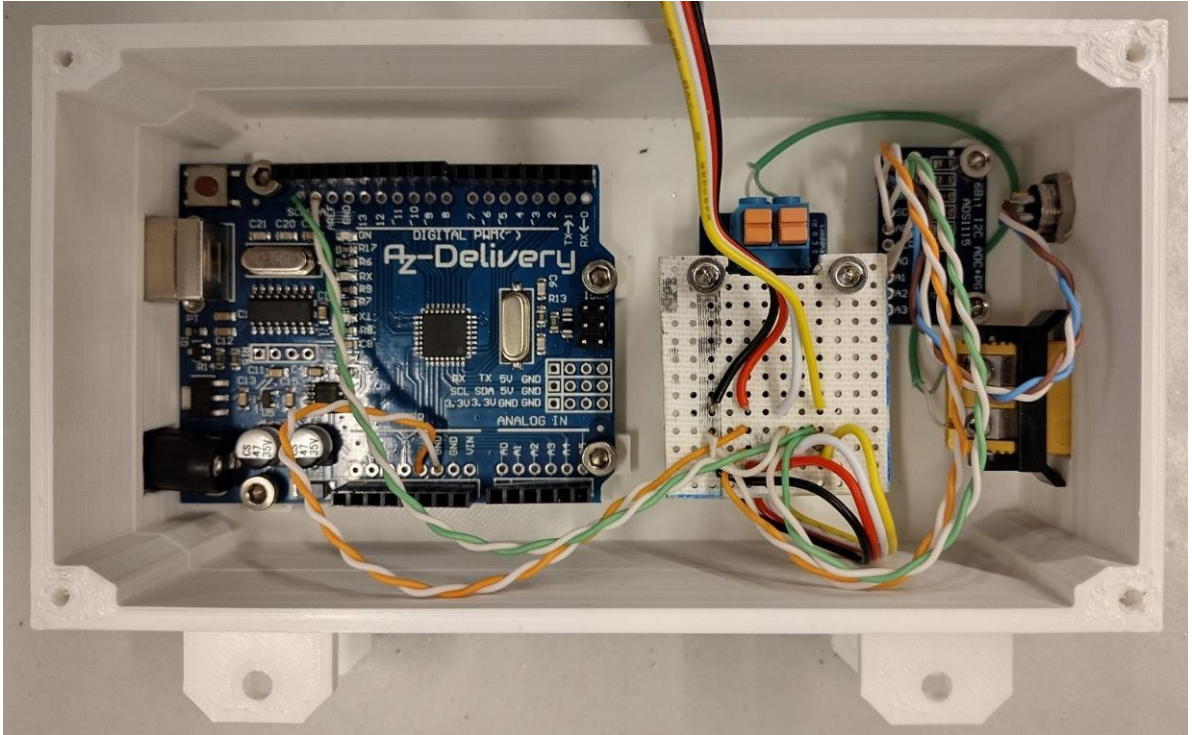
The additional cut made on the universal PCB (before soldering) is visible, which allows for avoiding any collision with the thermocouple connector on the MCP9600 board. After successfully powering up and testing the circuit, all the boards are securely installed in their designated positions within the 3D-printed case.
